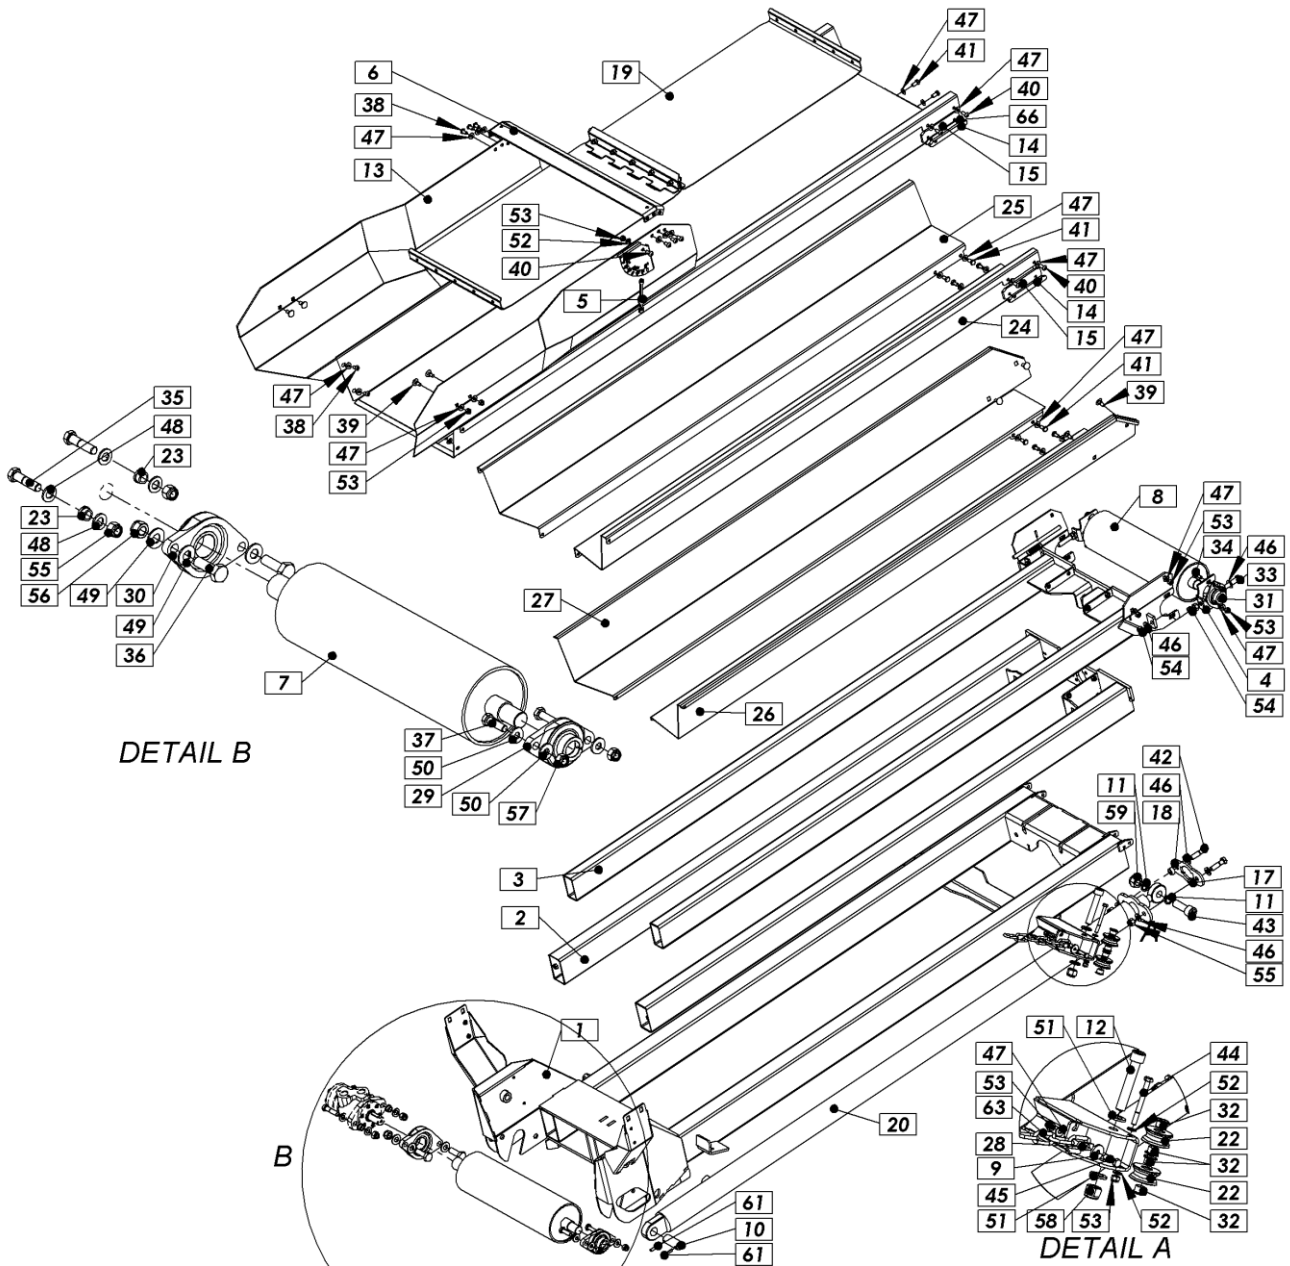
900.05.215.B - Conveyor belt basic kpl
